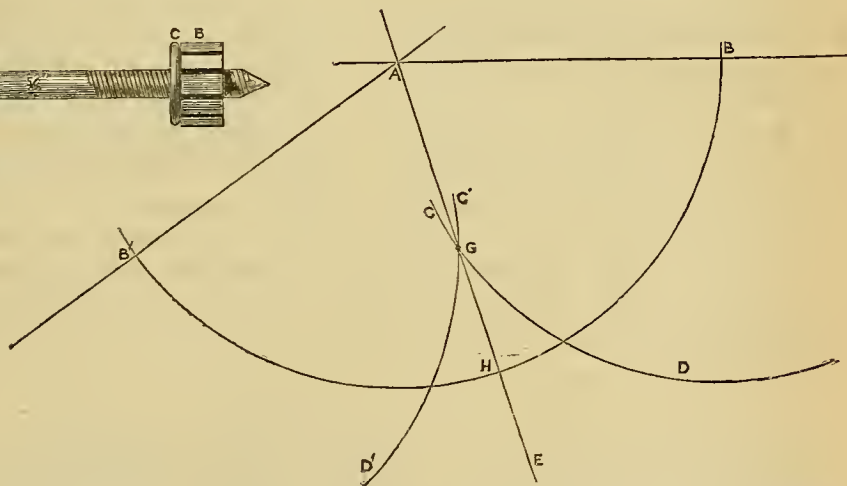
DIAGRAM SHOWING HOW TO OBTAIN PROPER BEVEL FOR CONNECTION OF PARTS OF POLE.
